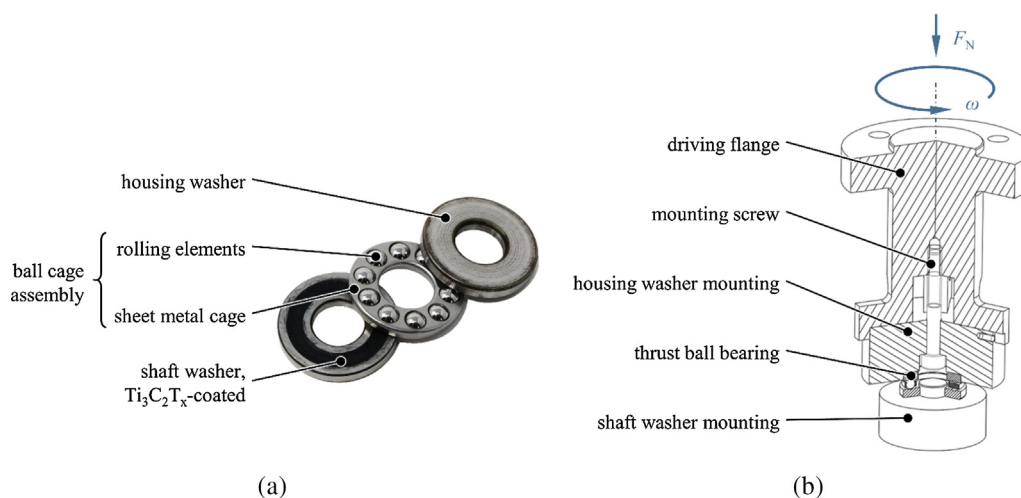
Housing washer, ball cage assembly and exemplarily $\text{Ti}_3\text{C}_2\text{T}_x$ -coated shaft washer of a thrust ball bearing 51201 (a) and set-up within the tribometer for service life testing (b).
